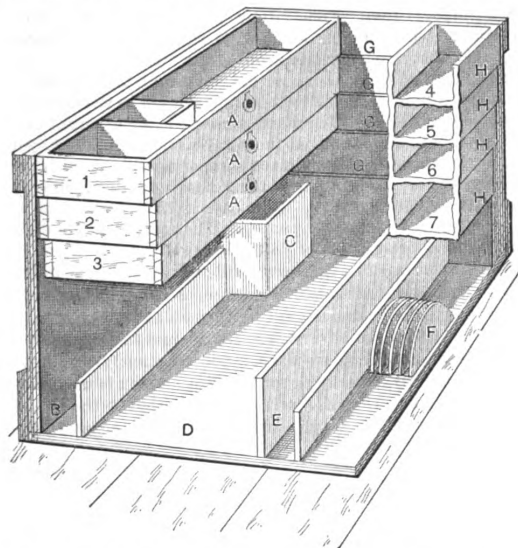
View of Interior of Chest, the Front and One End Being Removed to Show the Arrangement.
